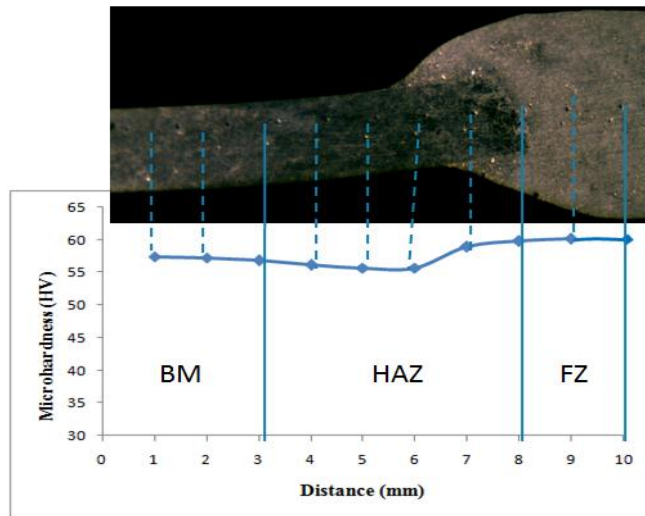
Hardness value of weld joint AA6061-AA6061 using filler ER4043
